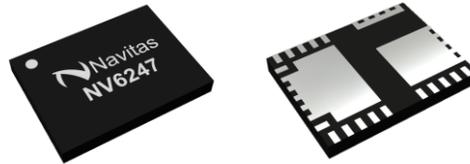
Top & bottom views of 3D mechanical model of NV624x (.stp file)
